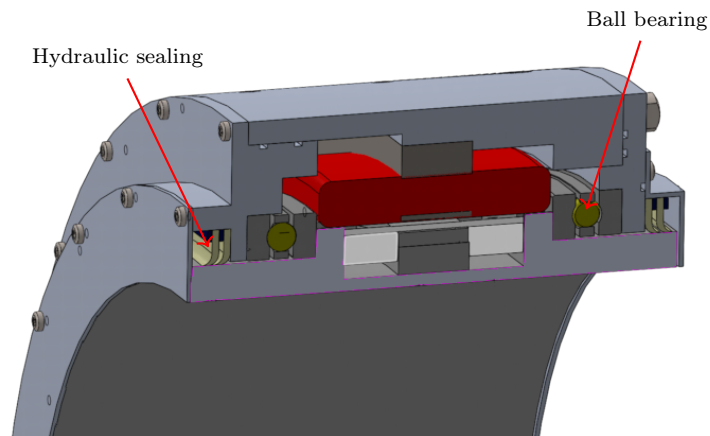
Second design of the machine the ball bearing and the hydraulic sealing are shown
